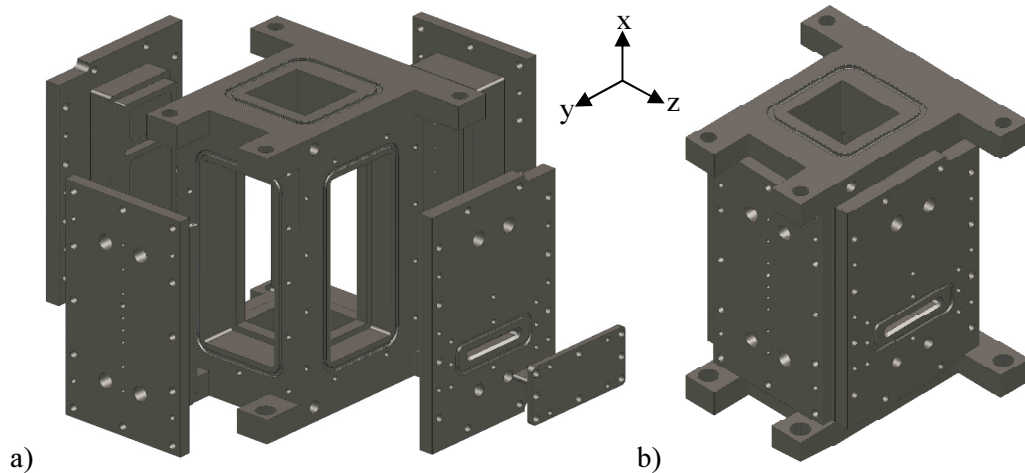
Constant area section solid model a) exploded isometric view with solid side walls, b) assembly isometric view.
